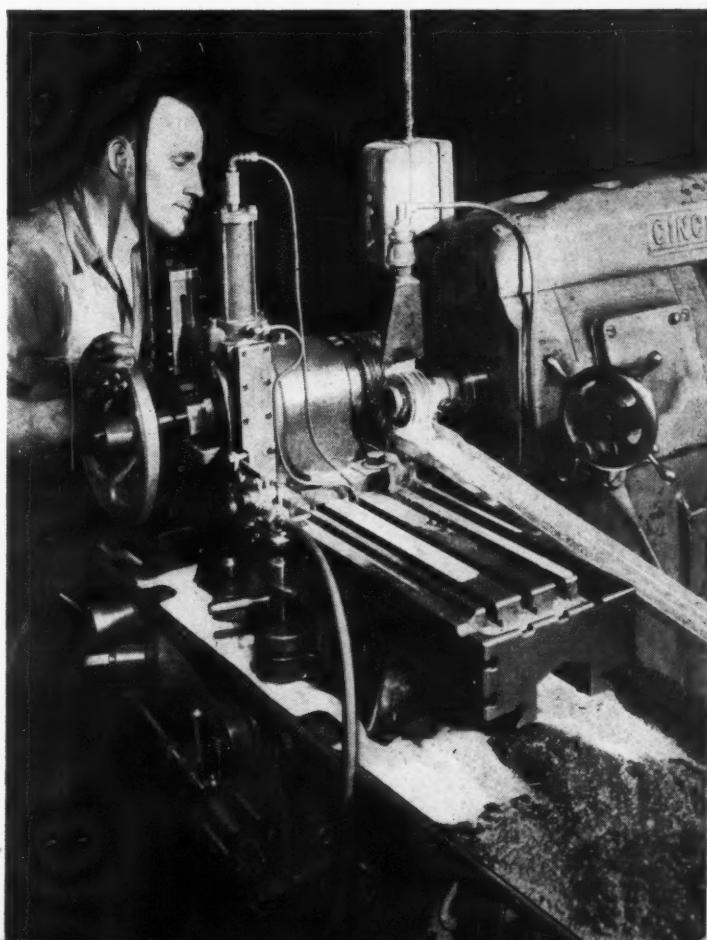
Vents are automatically milled in the outer periphery of oil control rings, using air-operated fixtures
